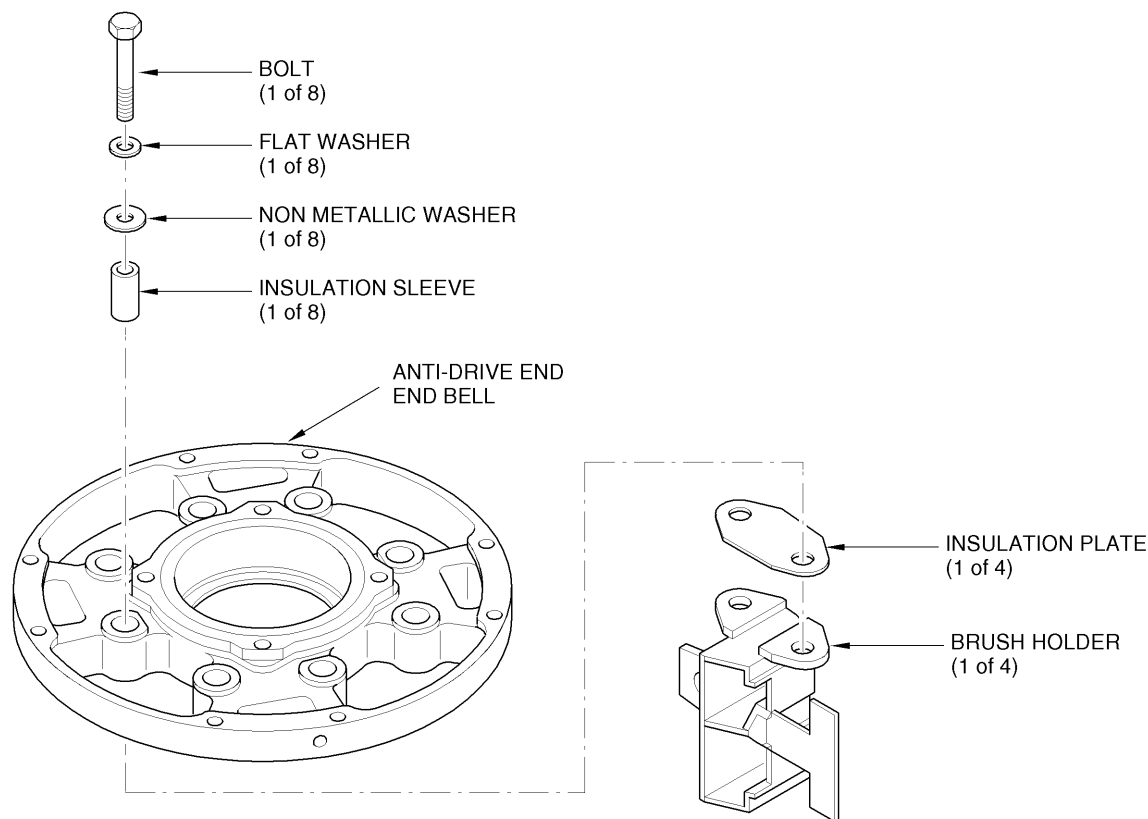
Bearing and Brush Support Assembly Detail (with Bolts)
